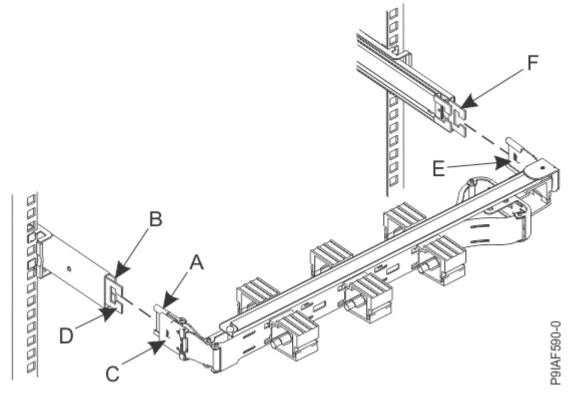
Relative positions of the parts of the cable-management arm before assembly
